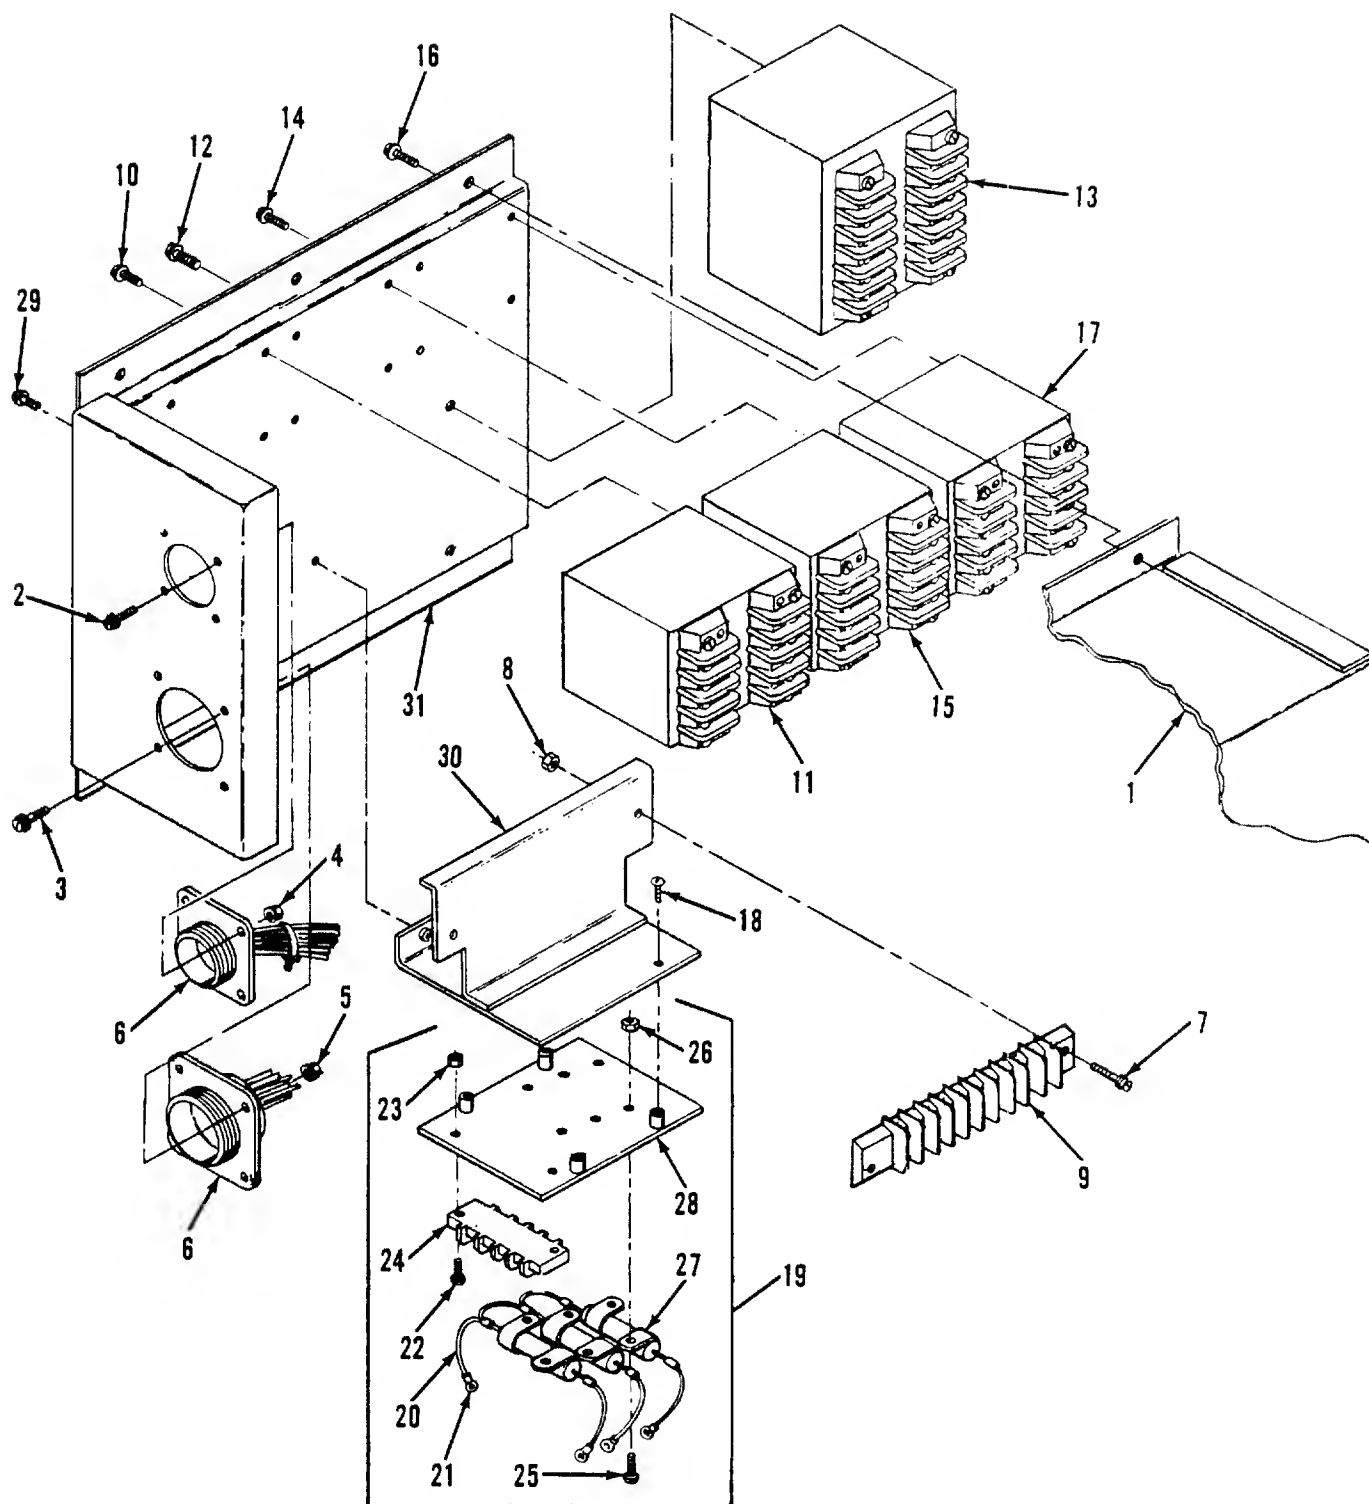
Tactical Relay Box A29, Exploded View (Sheet 1 of 2)
